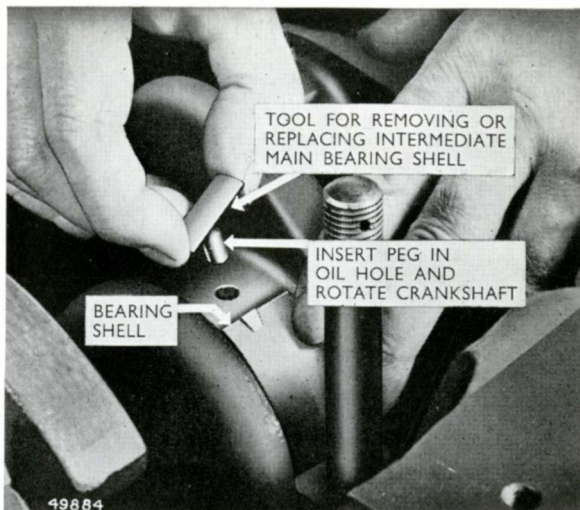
REMOVAL OF INTERMEDIATE BEARING SHELL
